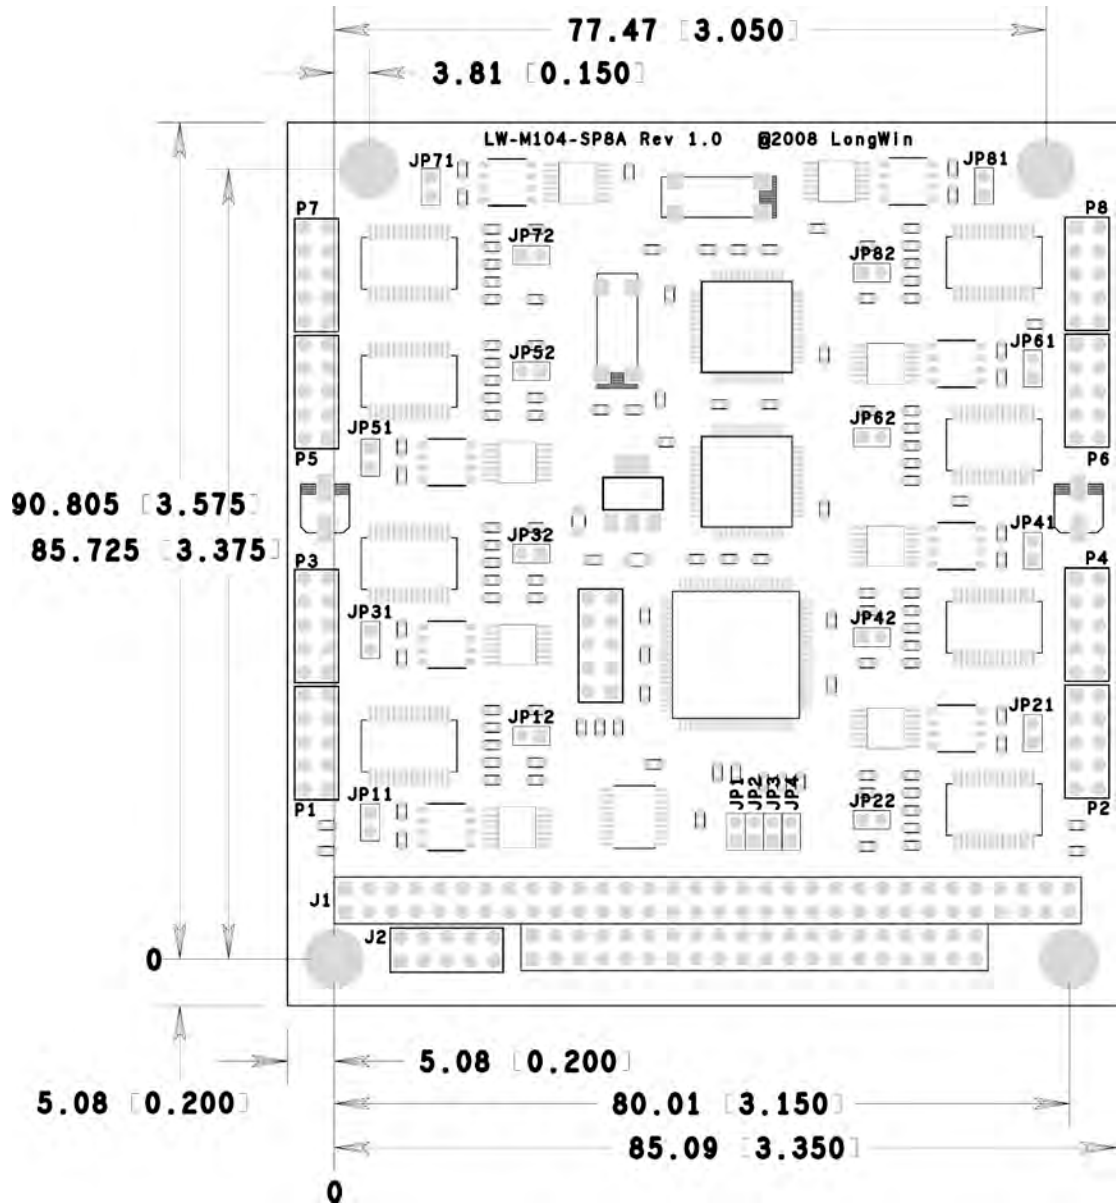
LW-M104-SP8A (DX) Board Dimension (Millimeter)
